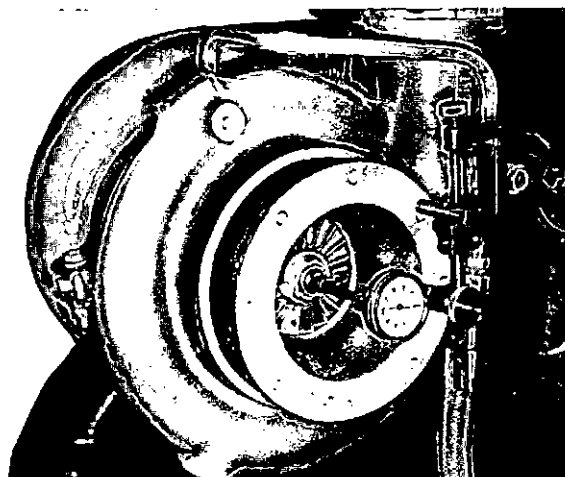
, N11956. Checking T-50 turbocharger bearing end clearance
